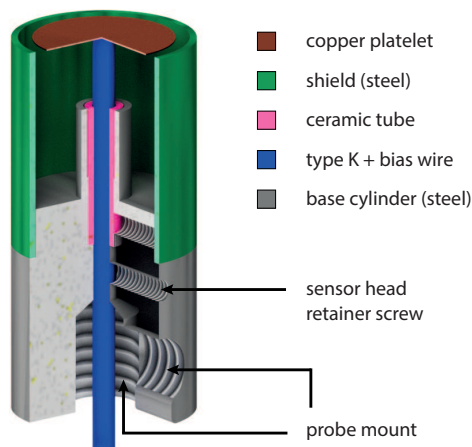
Schematic drawing of the PTP sensor head. The Type K thermocouple and the bias wire are spot-welded to the back of the copper platelet that represents the substrate. The whole sensor is housed in a stainless steel cylinder to shield it from any surrounding influences other than the ones coming from the upper half-space.
